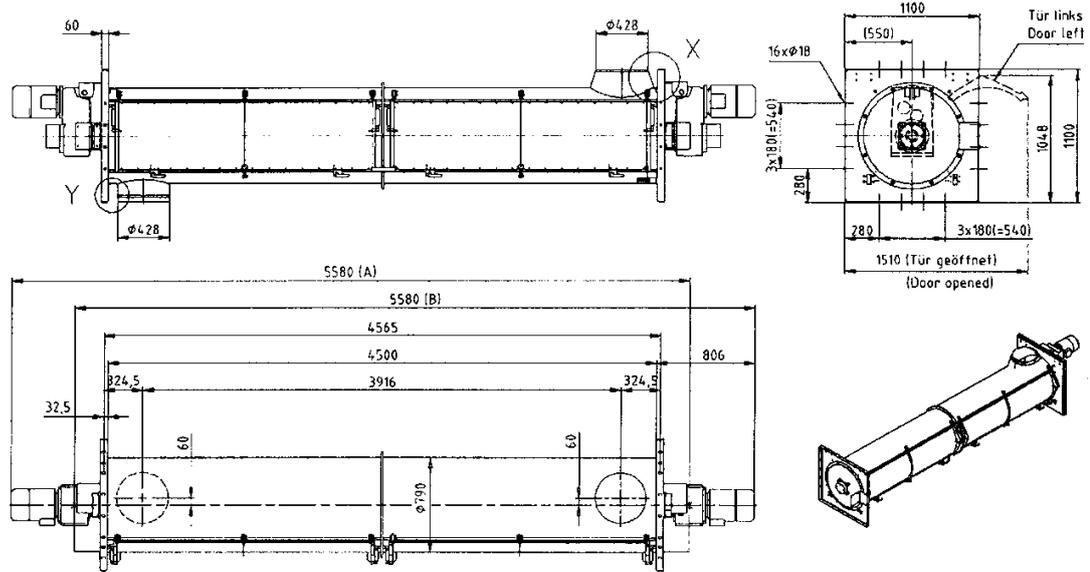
Dimensioned drawing Retentioner 2000 left
